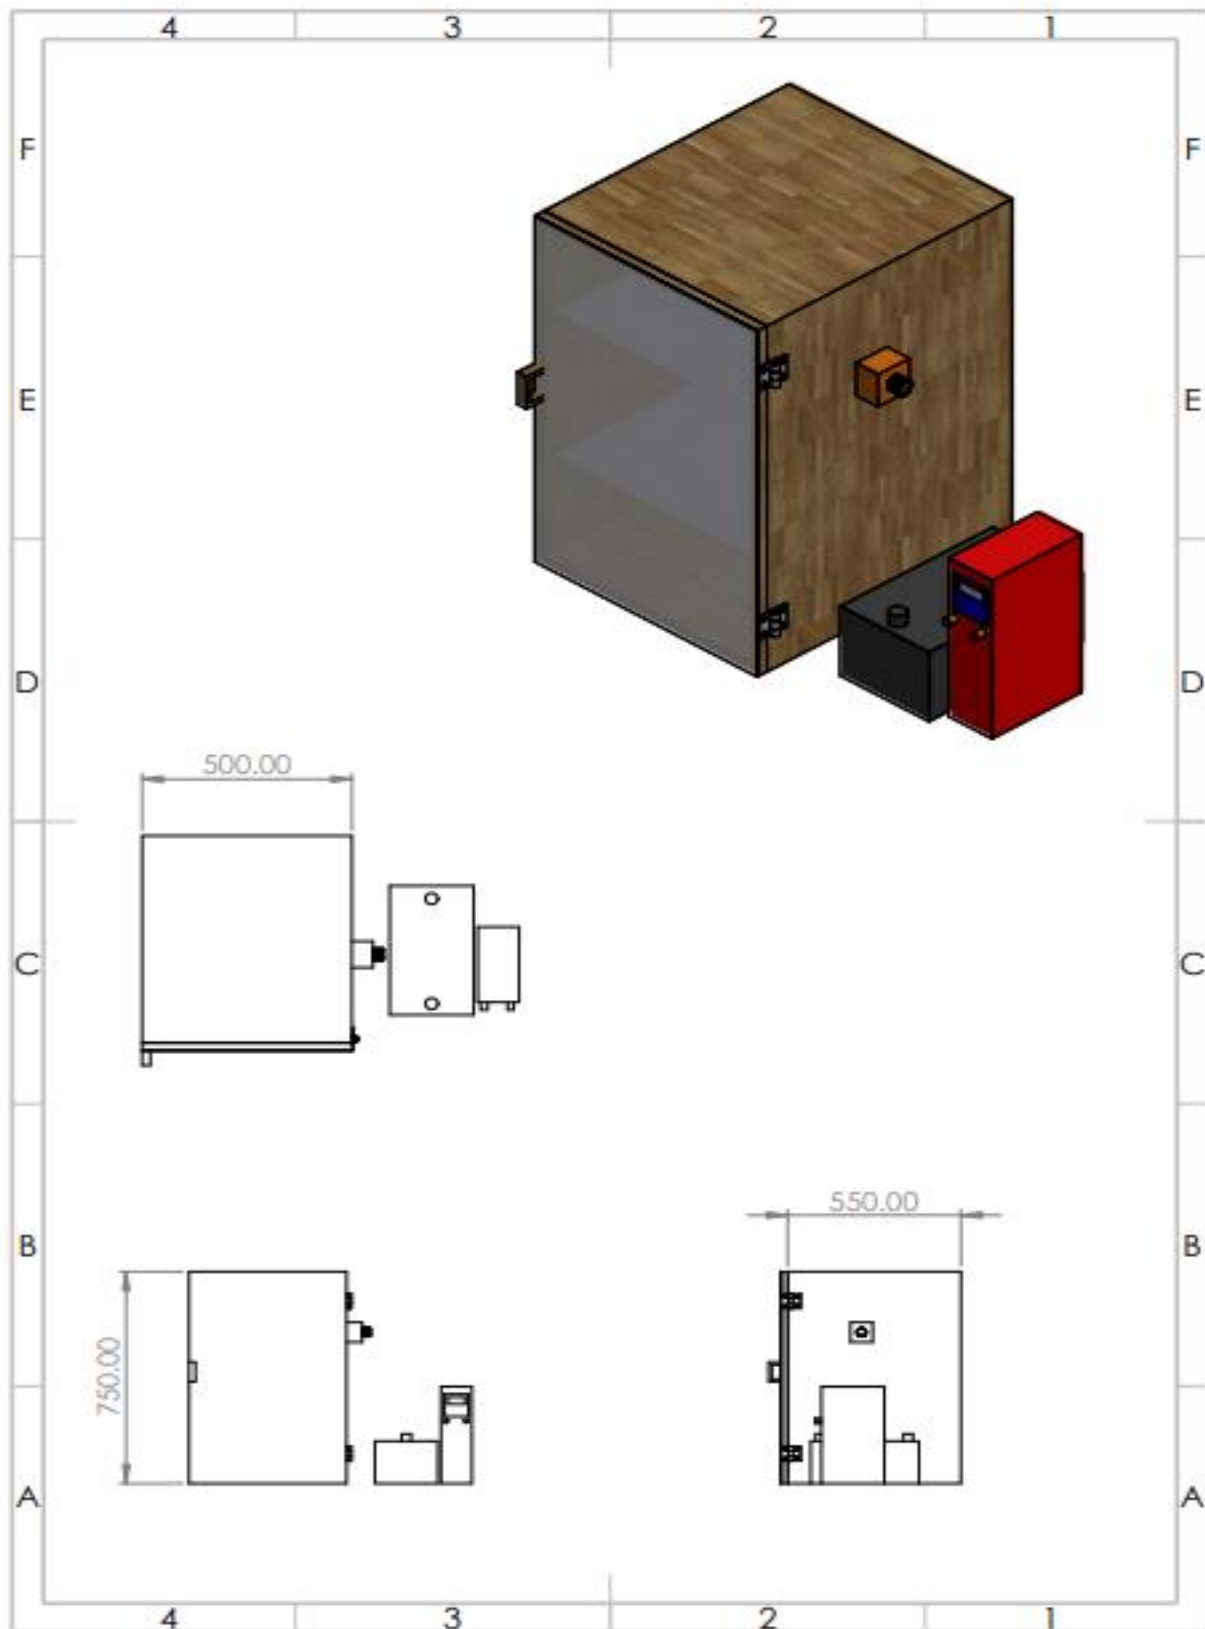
2: 3D & 2D view of solar incubator with dimensions
